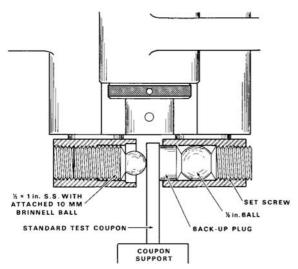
Schematic Drawing of Calibration Accessories for Falex Pin and Vee Block Test Machine
